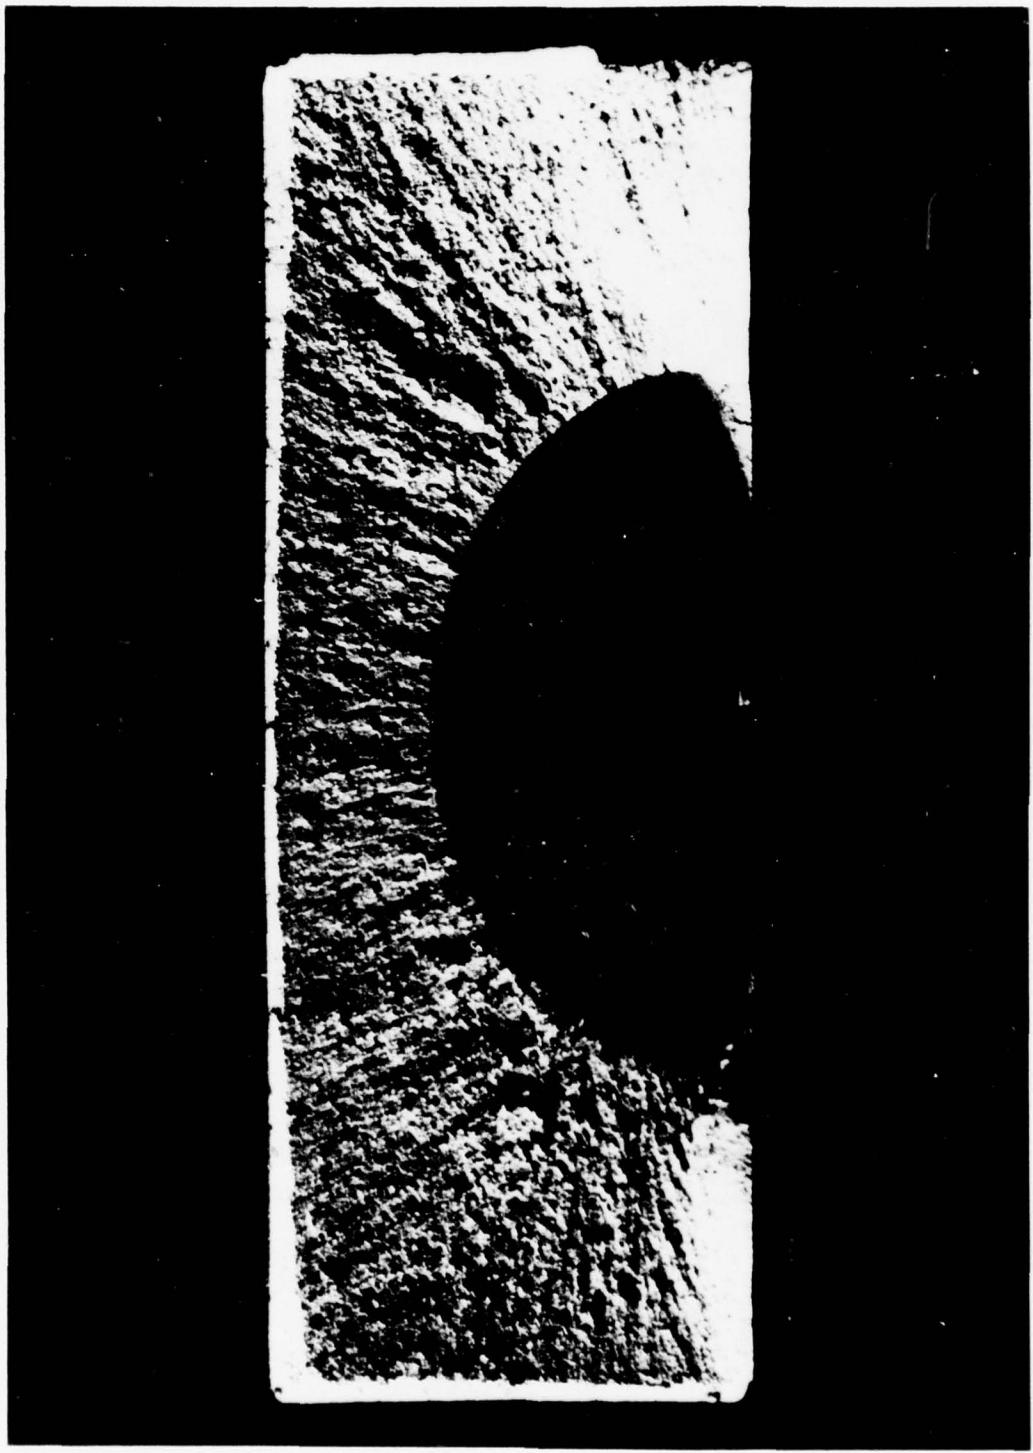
Macrofractograph for 1000°F Surface Flaw Specimen
